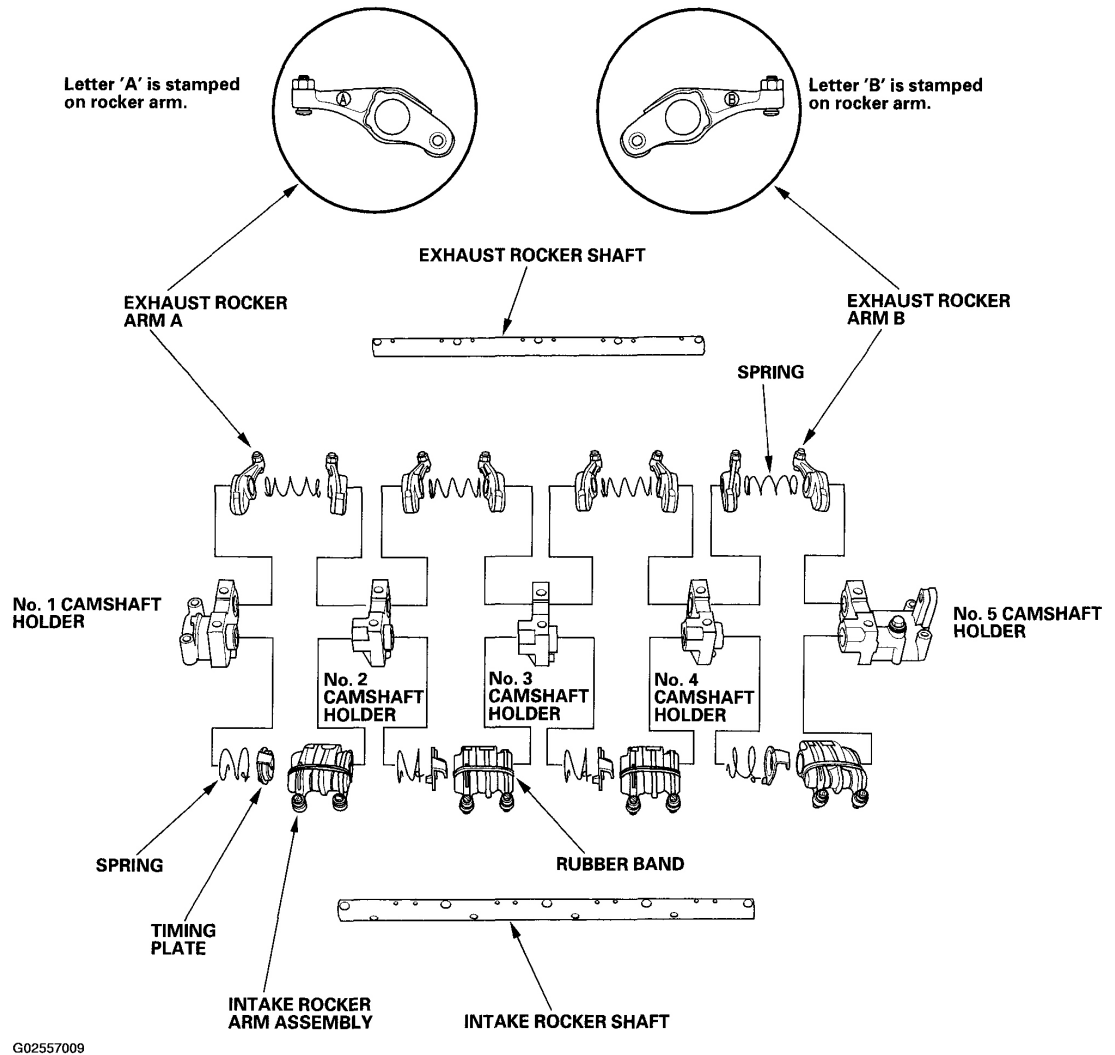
Exploded View Of Rocker Arms & Shafts Assembly - F23A1 & F23A4 Engines
